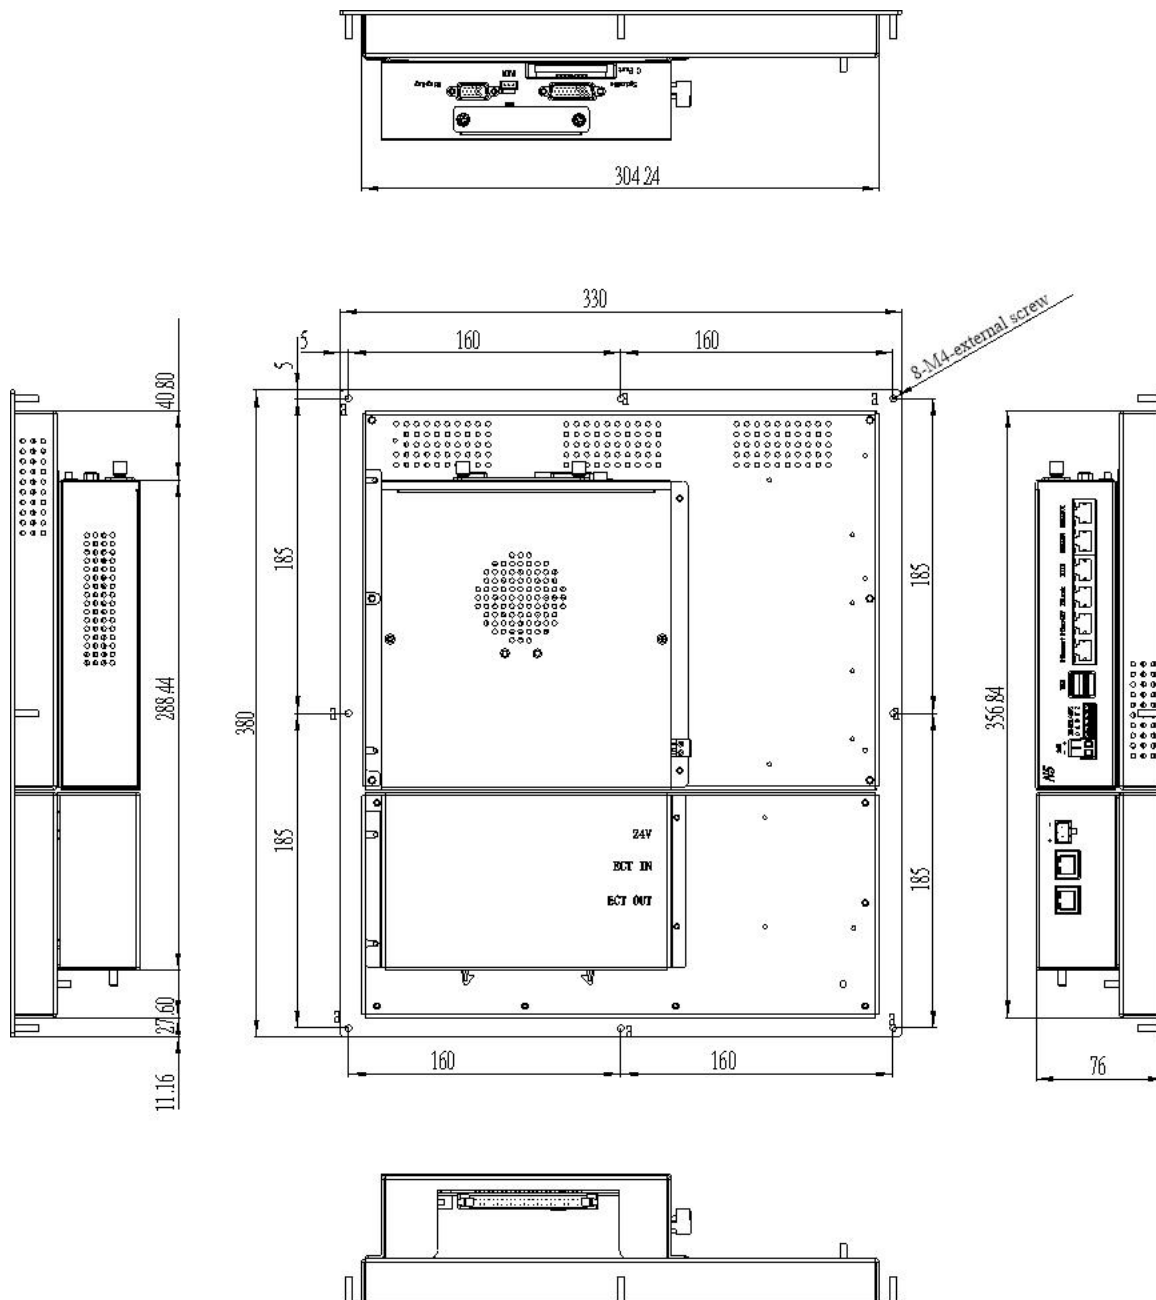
N5 All-in-One Controller Upper Panel Mounting Hole Locations and External Dimensions
